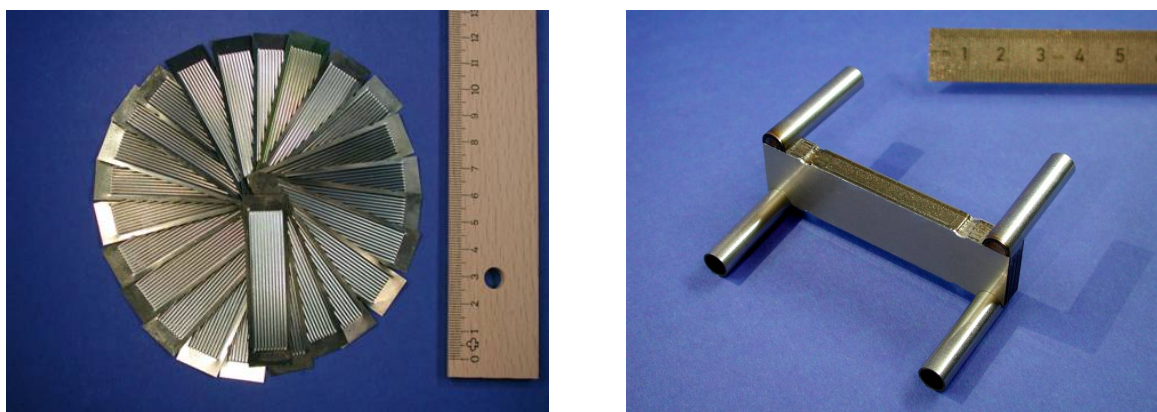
Micro-structured steel foils fabricated by embossing (left); embossed and laser-welded heat-exchanger (right).
